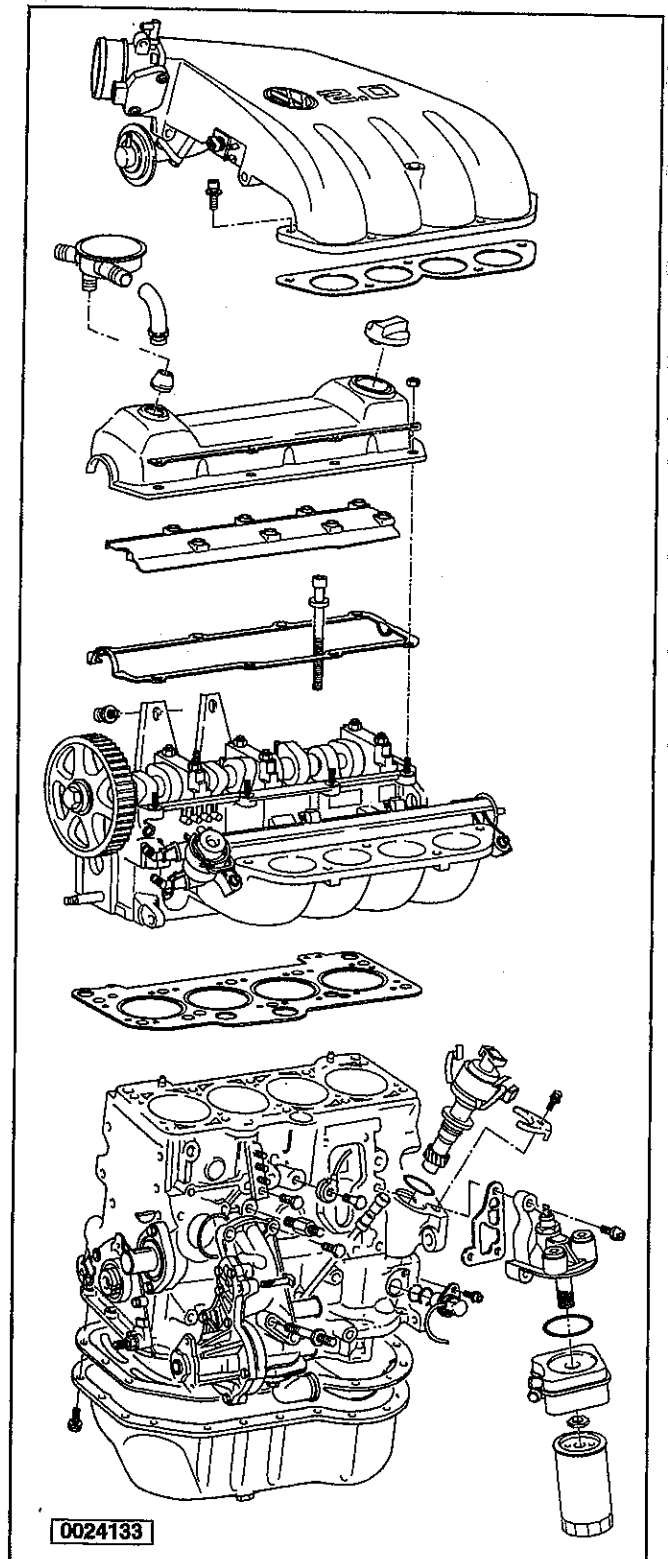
Exploded view of 2.0 liter (ABA) engine.
